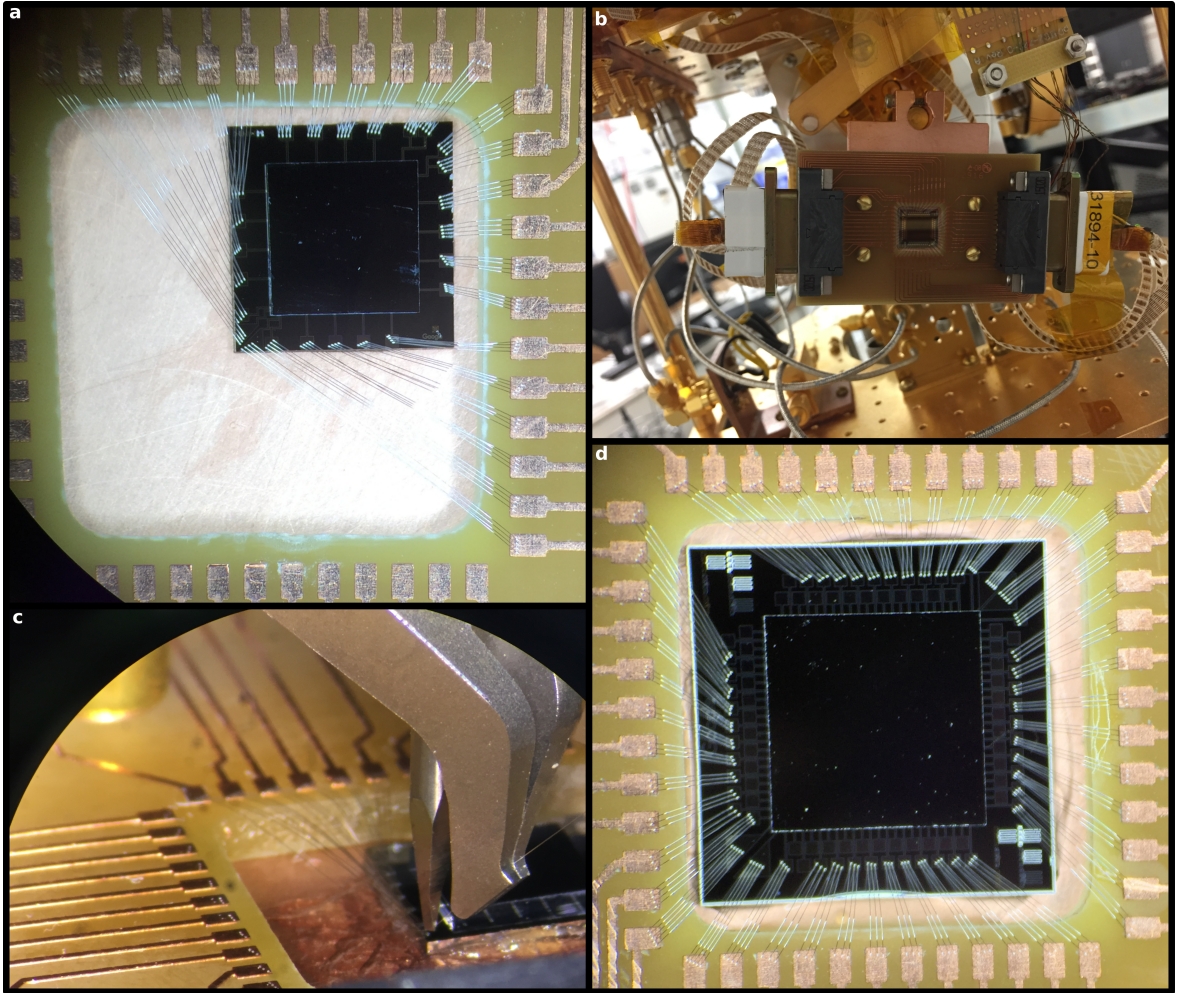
Wire bonding for DC testing. Here we wire bonded chip that was too small for our sample mount which necessitated very long wire bonds.
